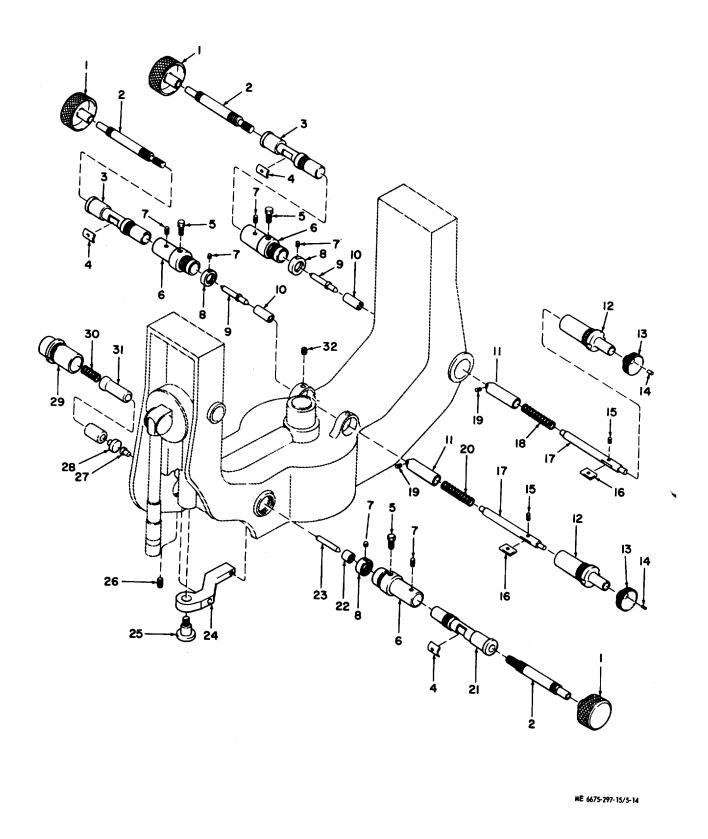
Slow motion screws; removal, disassembly, reassembly, and installation.
